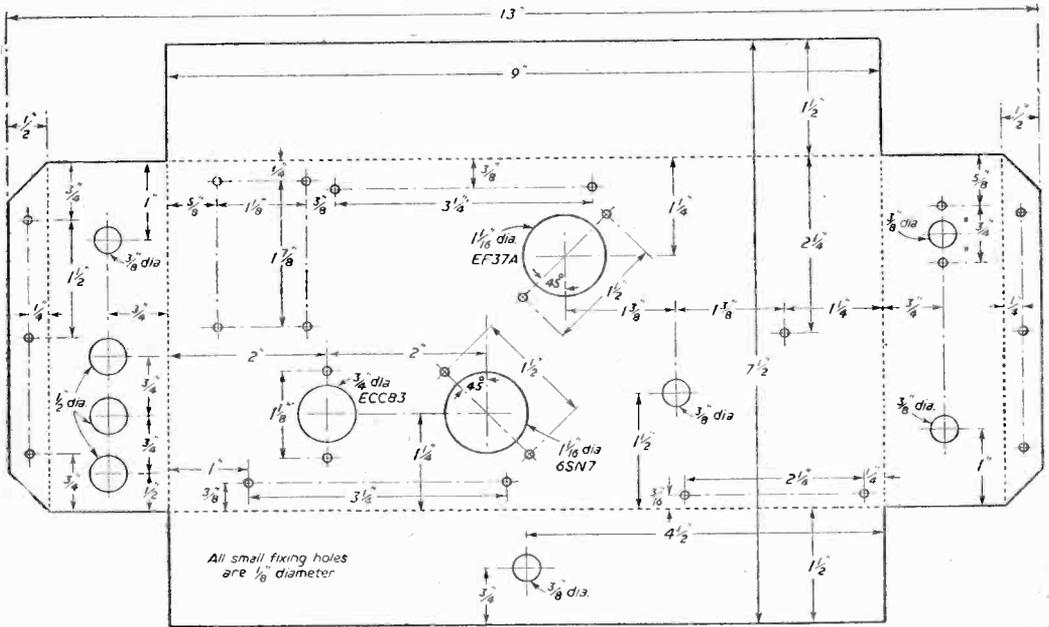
Chassis cutting and drilling details for the pre-amp.
